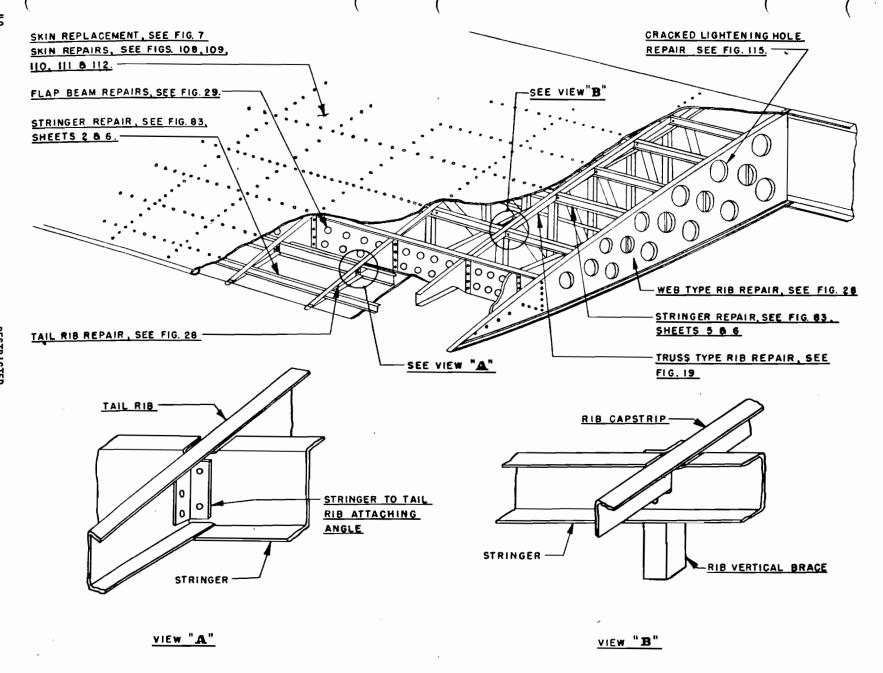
Wing Center Section Trailing Edge Section Repair Reference Diagram
